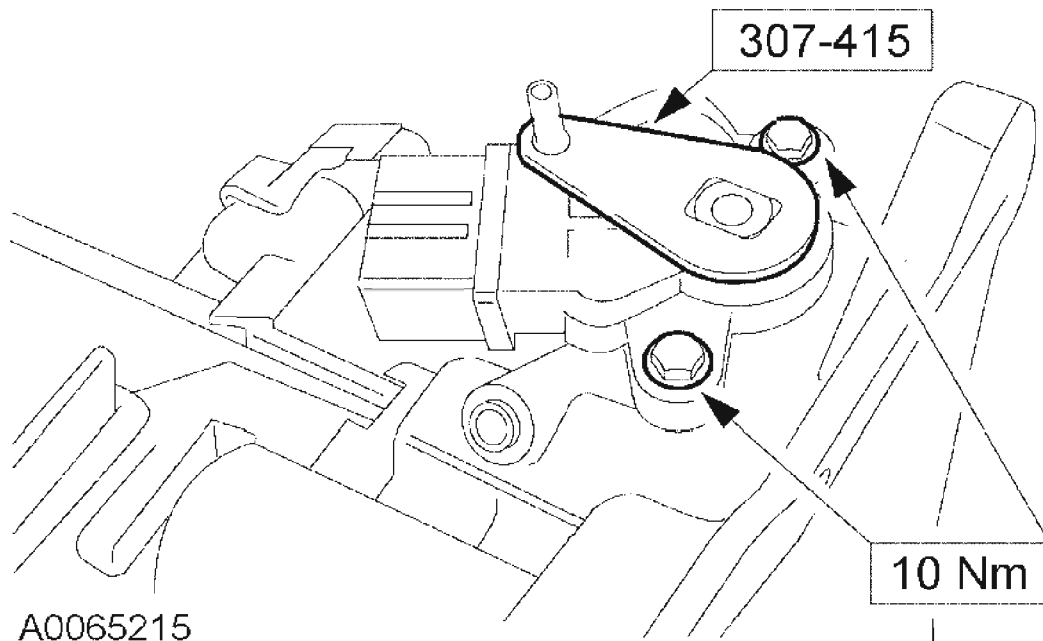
Aligning TR Sensor And Tightening Bolts Using Special Tool
